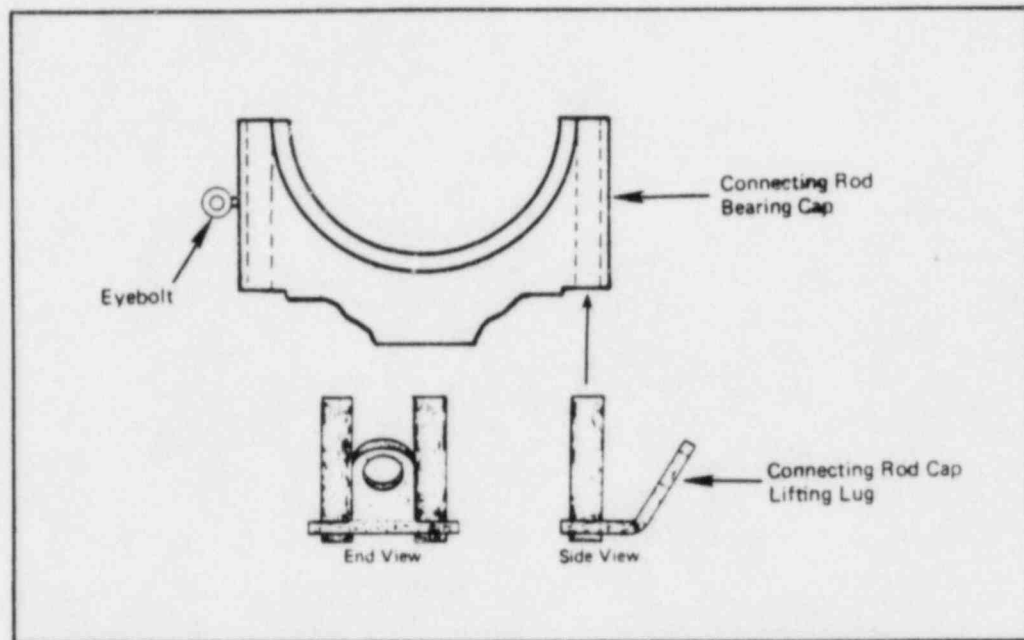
C-2. Connecting Rod Cap Lifting Methods
